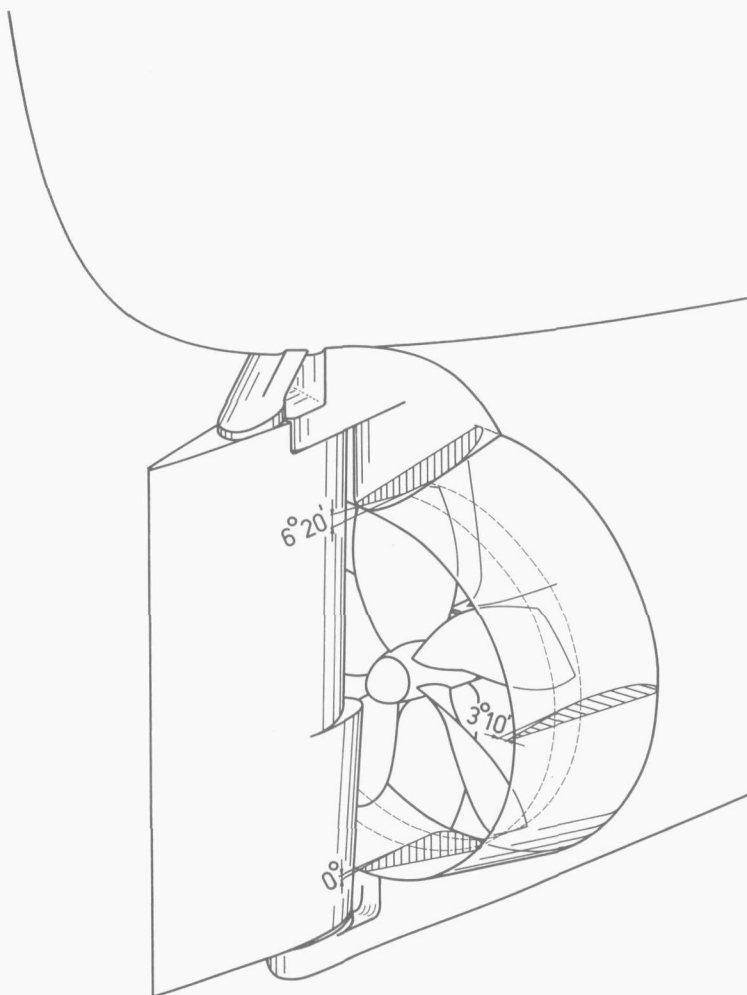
View of stern of tanker fitted with non-axisymmetrical ducted propeller.
